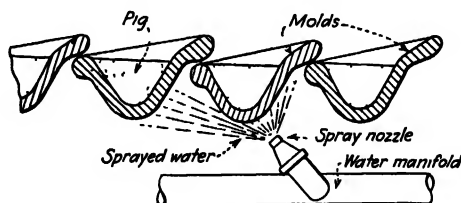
WATER SPRAY COOLING MOLD ON PIG MACHINE.
